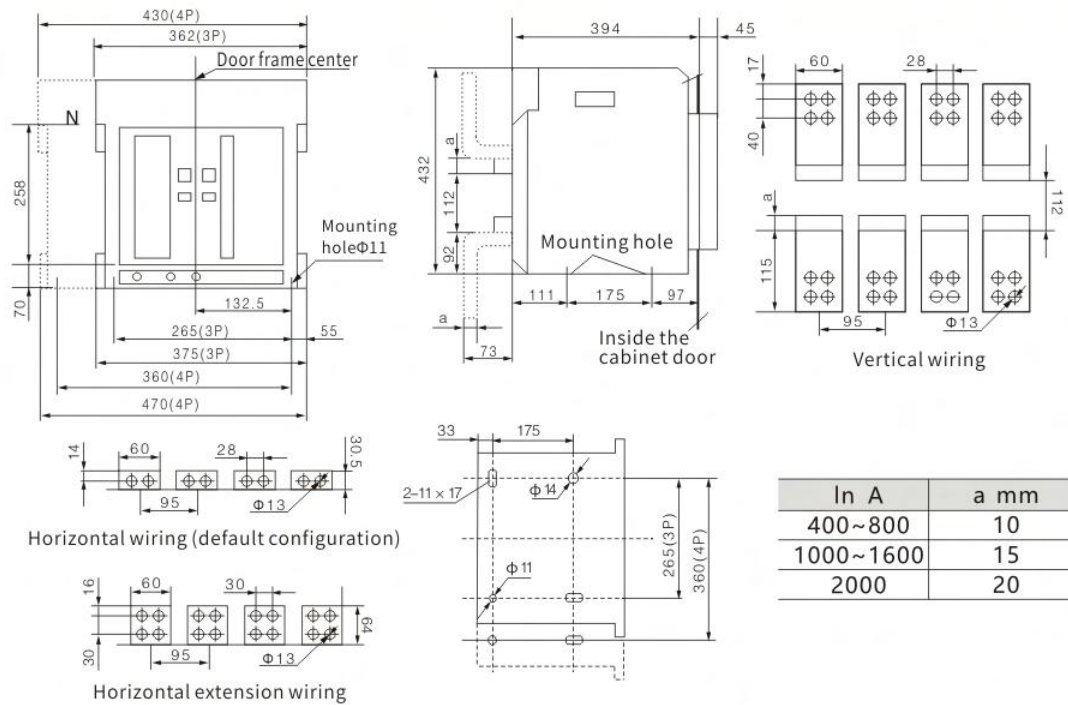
Outline and installation dimension of the draw-out type circuit breaker (JUW1 2000, 2000/4)
